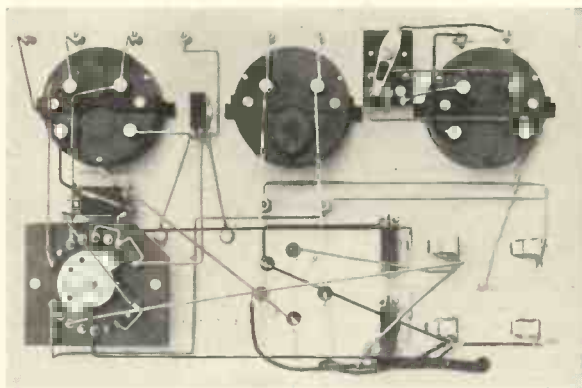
THE COMPLETELY WIRED TESTING SET
